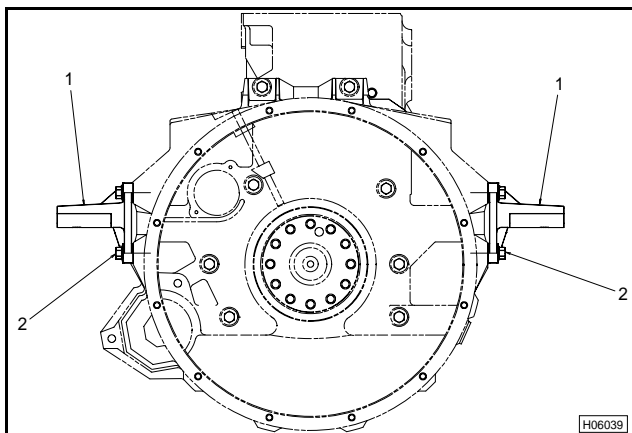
Loosening engine mounting bolts (148-tooth ring gear only)
